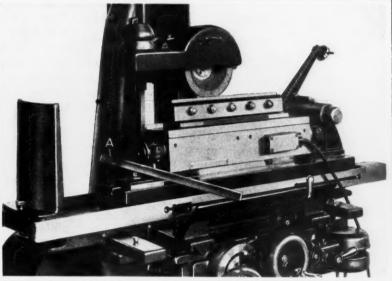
Grinding a Bevel on a Straight Knife by Using the Same Machine as Shown in Fig. 4
